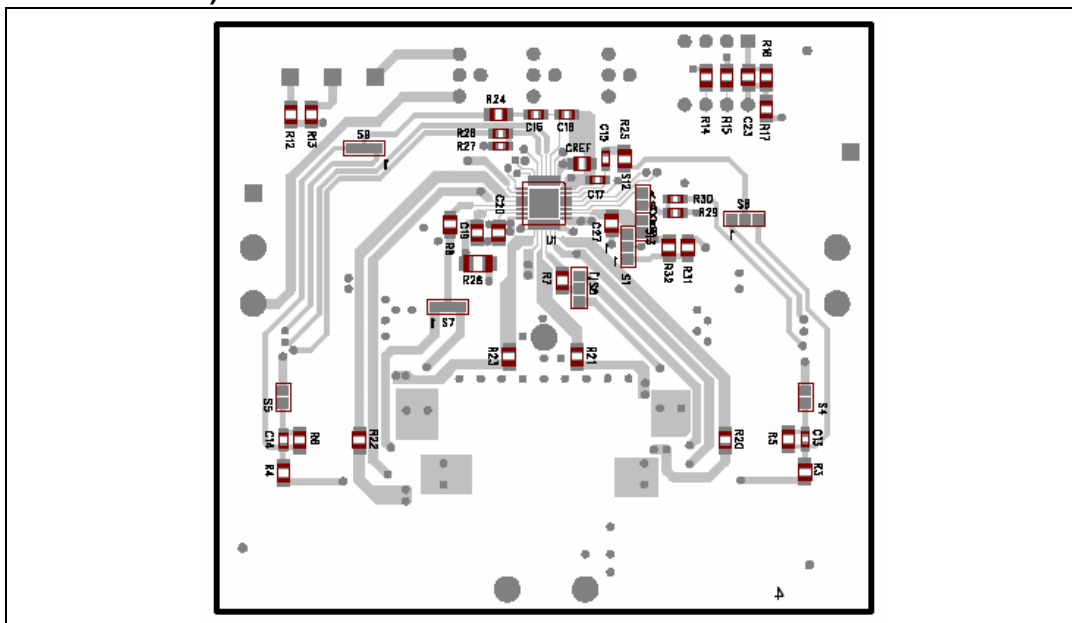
PM6680A eval board layout - bottom layer (PM6680A and component side)
